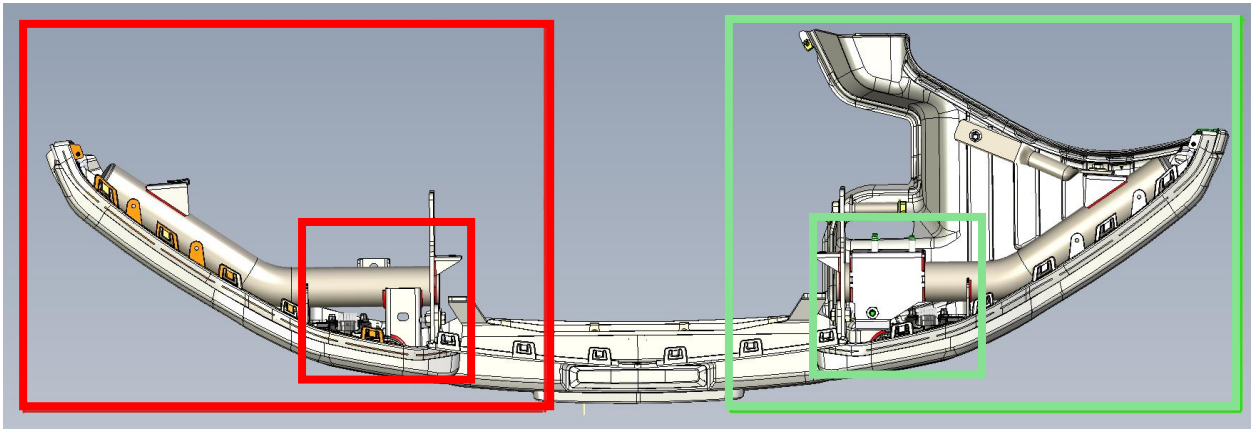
Top View Passenger side NO AEV Frame Bracket / Driver Side WITH AEV Frame Bracket
